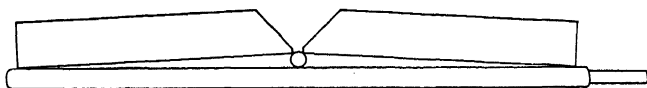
Butt weld plates offset to the thickness of a  $\frac{5}{32}$ -in. electrode.
